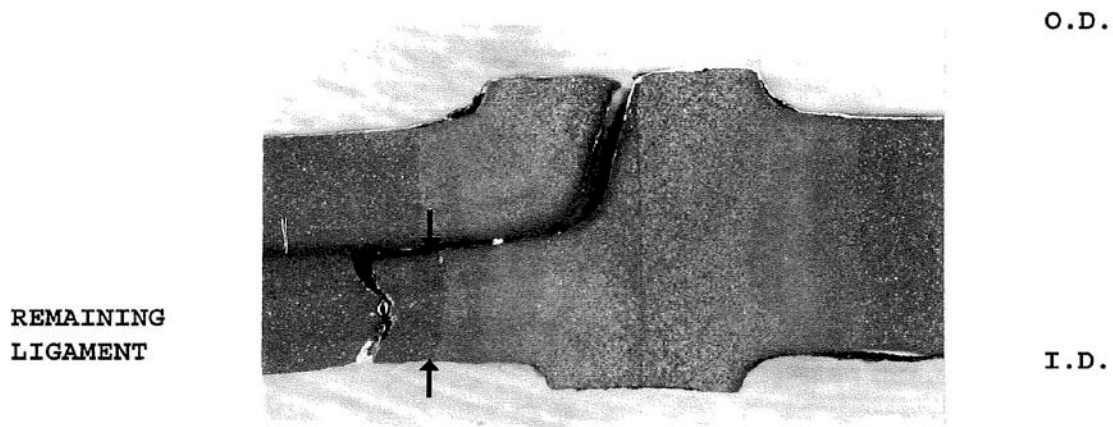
Cross Section of a Flash-Welded Seam Where the Hook Crack Extended Far From the Bondline (Failure is in the base metal.)
